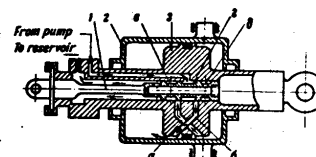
Booster Operation Diagram (position with aircraft control stick moving to right and slide valve shifted to right hand position)
